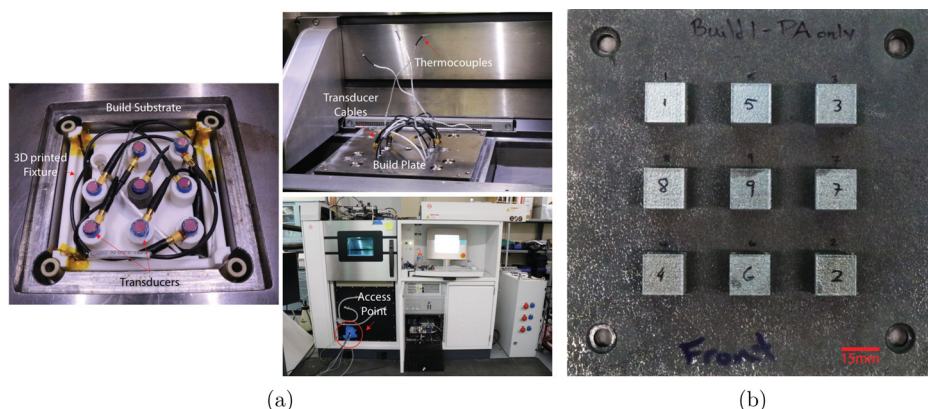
(a) Ultrasonic sensors within the substrate cavity with 3D printed fixture (left). Wiring path through the EOS M280 printer for the ultrasonic cables and transducers (right). (b) Actual build insert and printed samples.
